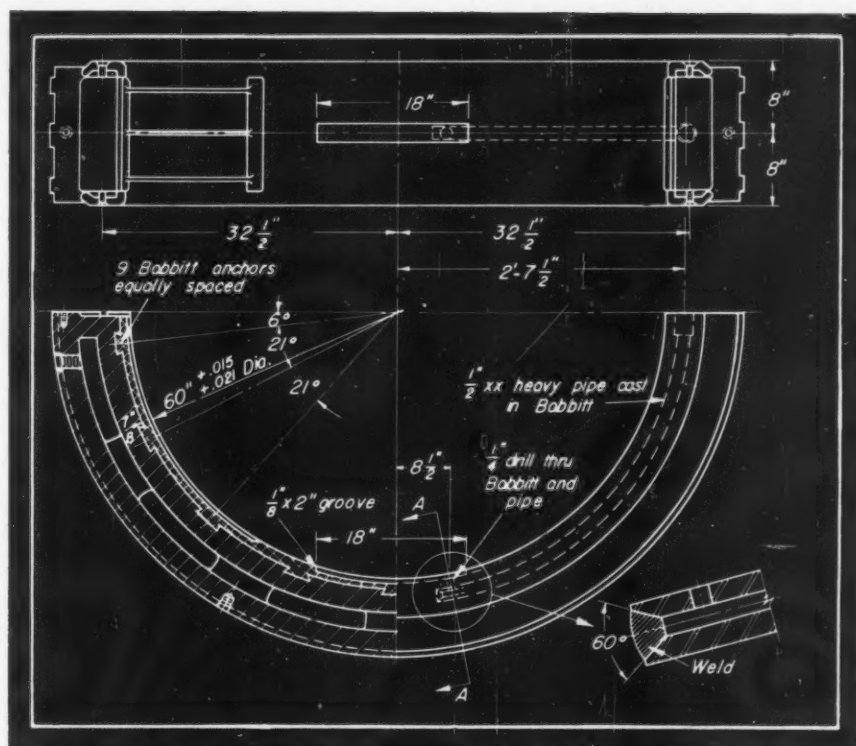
Detail of main bearing for ball mill, showing arrangement of high-pressure piping for oil lift. Drawing, courtesy Kennedy-Van Saun Mfg. & Eng. Corp.
